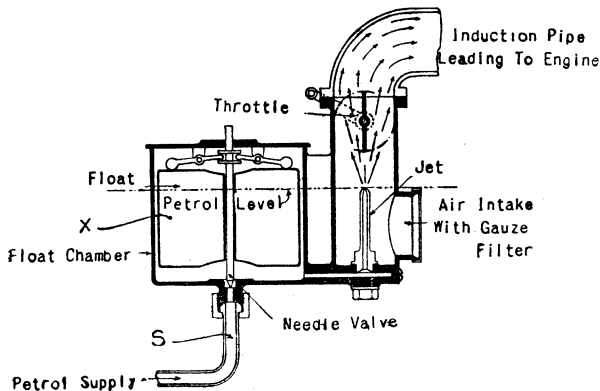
SIMPLE FORM OF FLOAT CARBURETTOR.
